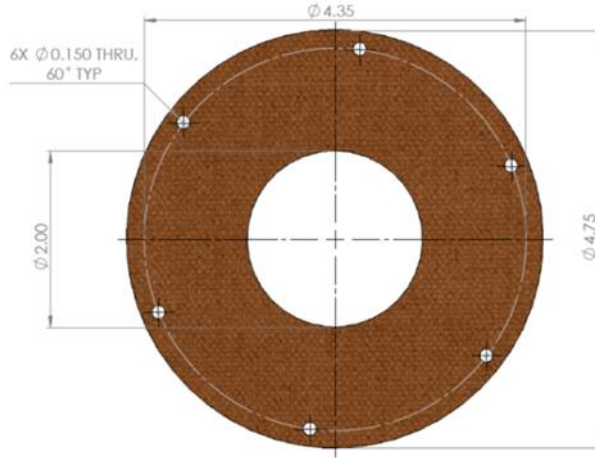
Dimensional drawing of a single circular metal mesh layer for a metal mesh thrust foil bearing (dimensions in inches).
